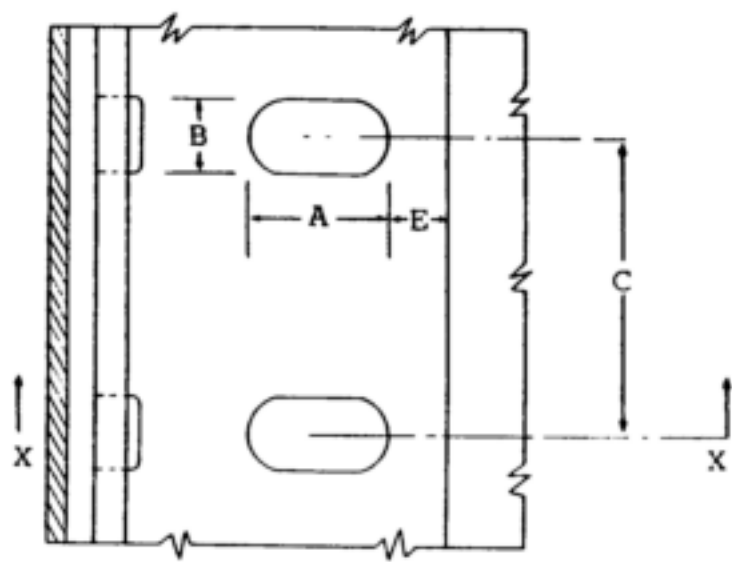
Butt strap weld on face hardened armor.
